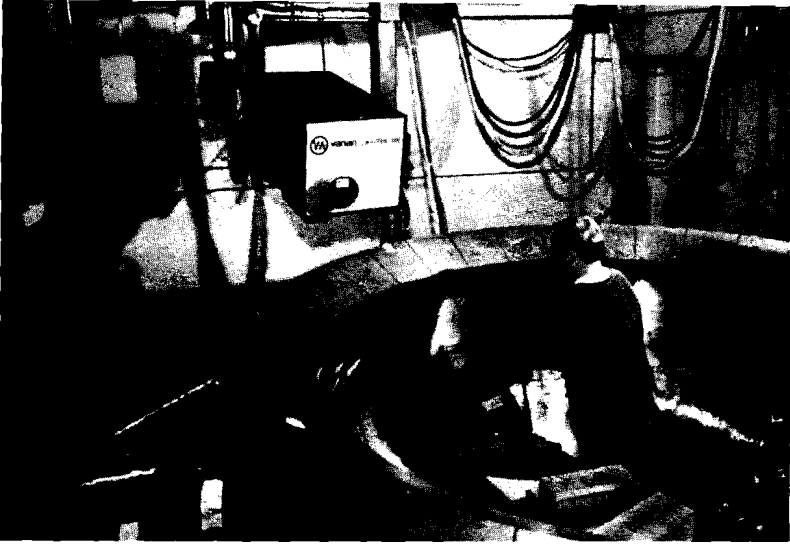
Radiographic linac and weld in pressure vessel.
